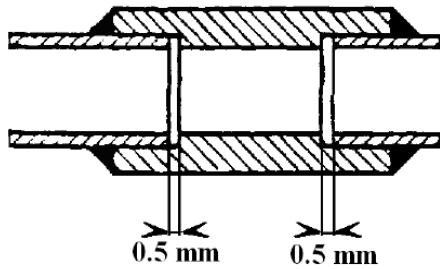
Fillet weld with 0.5 mm clearance
